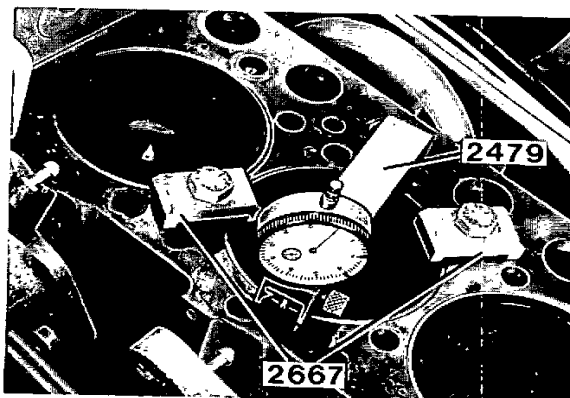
Checking the cylinder liner height above the cylinder block face.
